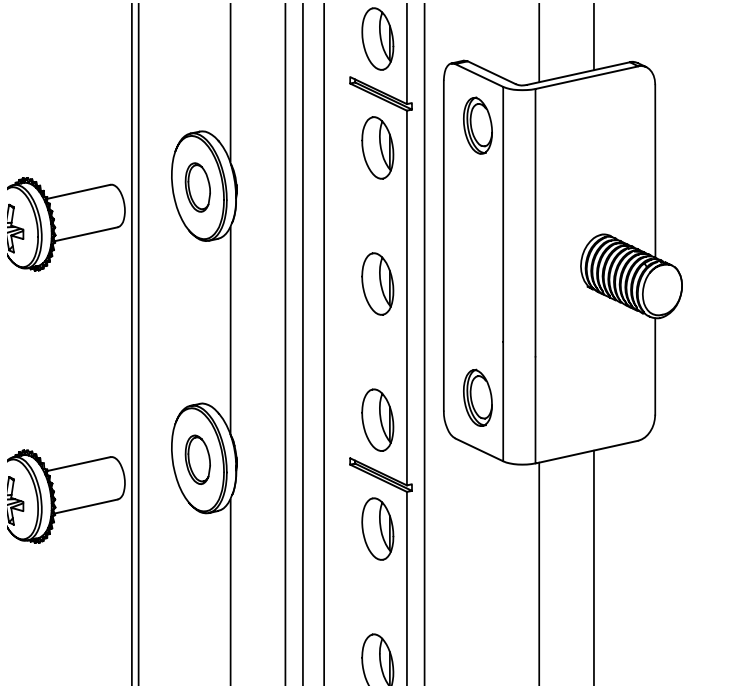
Installing the rear mounting brackets (HP System/e rack-left rear upright)
